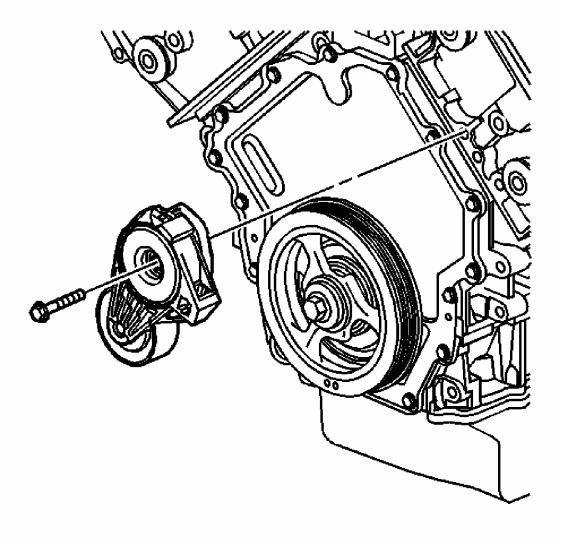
View Of Drive Belt Tensioner & Bolt Courtesy of GENERAL MOTORS CORP.
